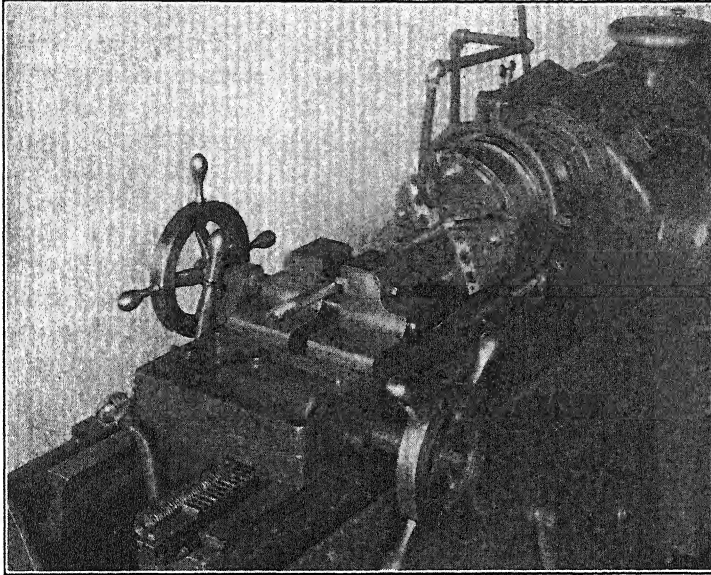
The Murchey Machine and Tool Co. Single-Head Bolt and Pipe-Threading Machine.
